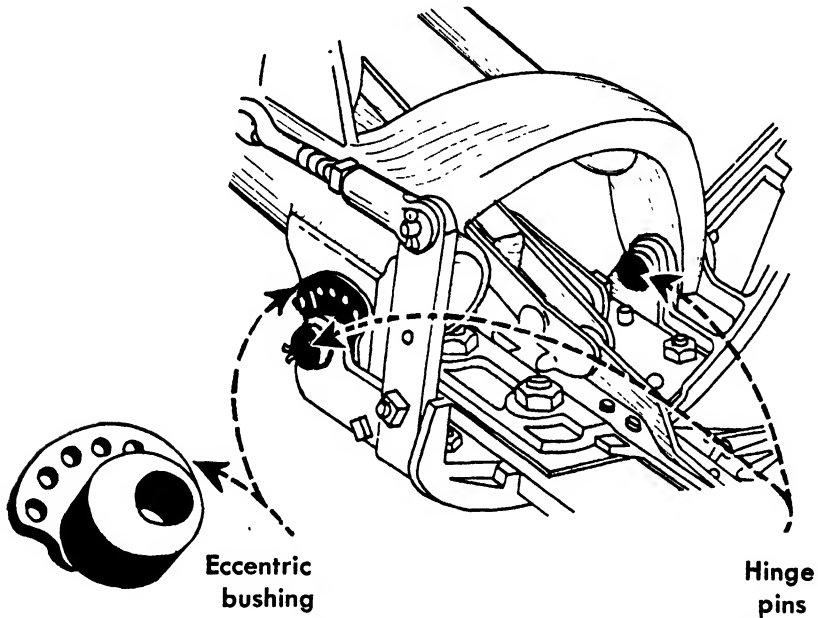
Adjustment for cutter-bar lead. An eccentric bushing is provided on the rear hinge pin of some mowers. Lead on other mowers may generally be restored by taking up play at the hinge pins or otherwise removing the cause of the lag.
